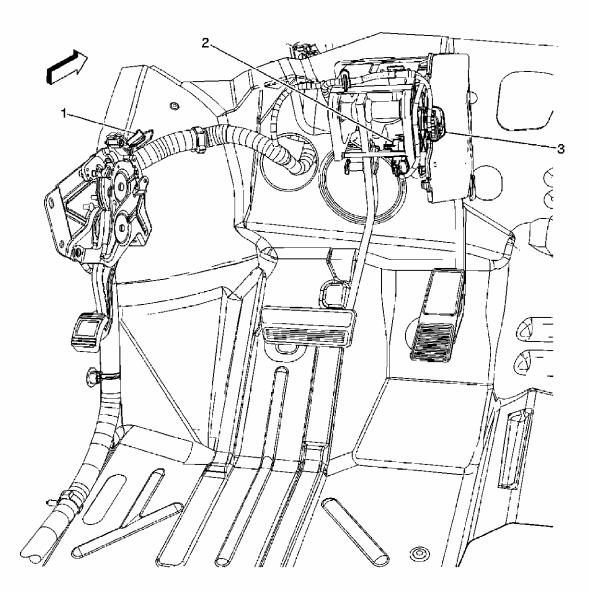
View Of Lower Left Side Of I/P Courtesy of GENERAL MOTORS CORP.
